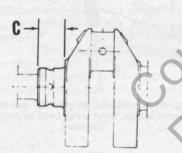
Gear end main bearing journal width (C) is 34.10-34.15 mm.
